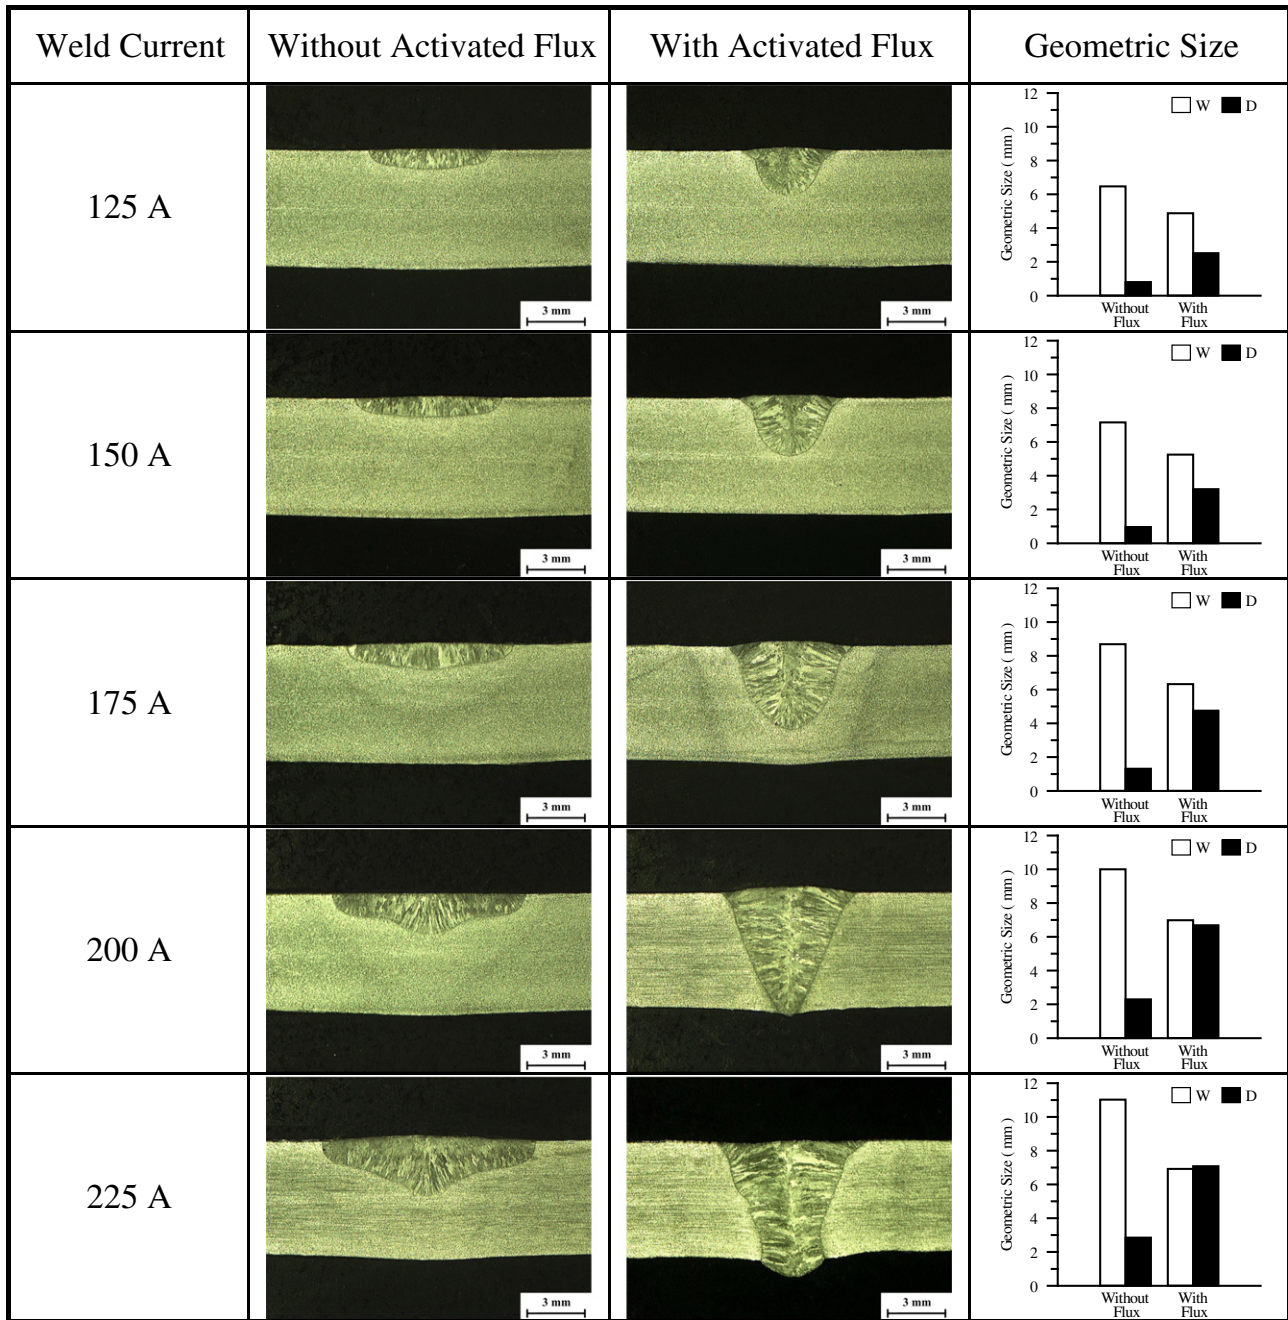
Effect of weld current on geometric shape of TIG weld.
